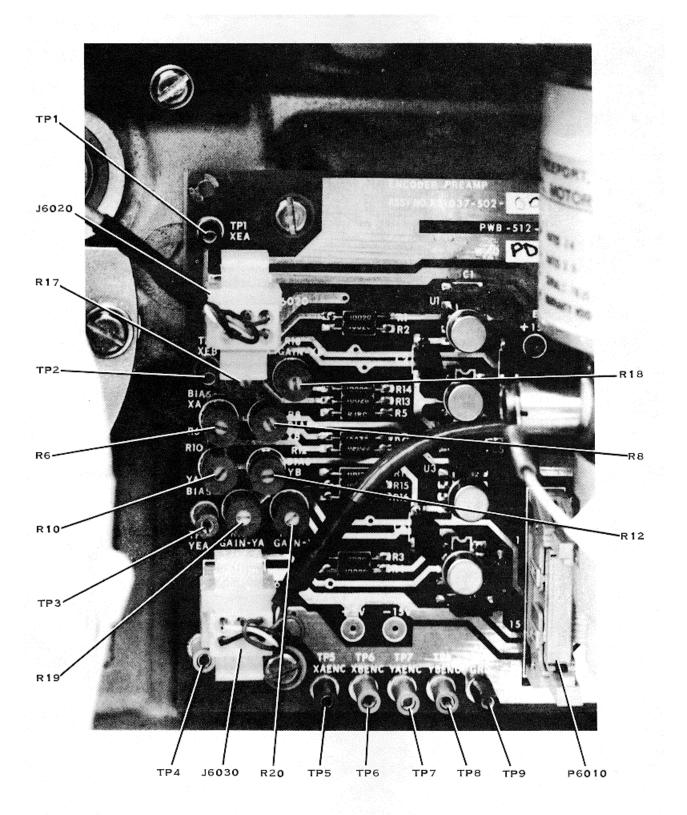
A4 Encoder Preamplifier PCB Test and Adjustment Points
